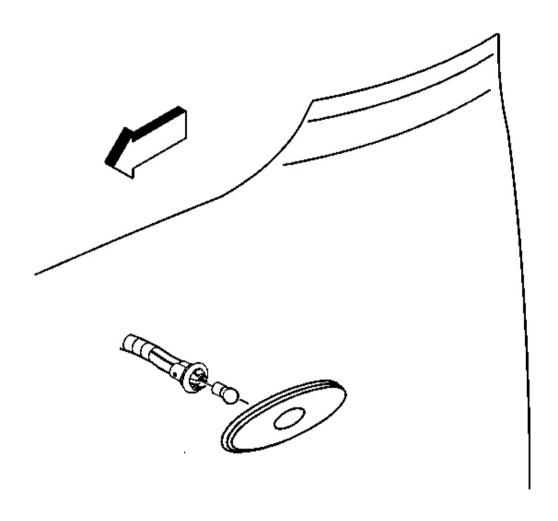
Front Side Repeater Lamp Socket To Front Side Repeater Lamp Assembly & Wheelhouse Filler Panel
